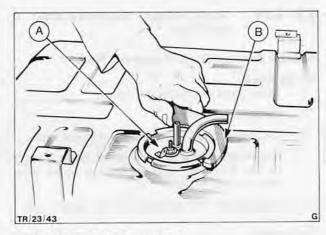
Removal of tank sender unit A – Tank sender unit B – Tool No. 23–009
